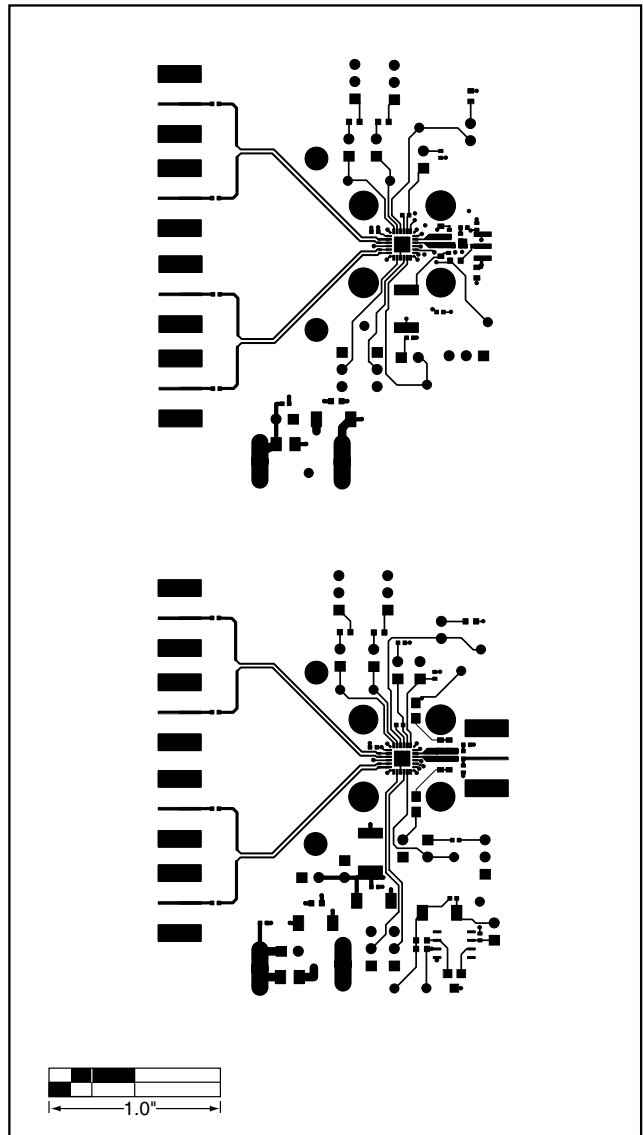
MAX3273 EV Kit PC Board Layout—Component Side
